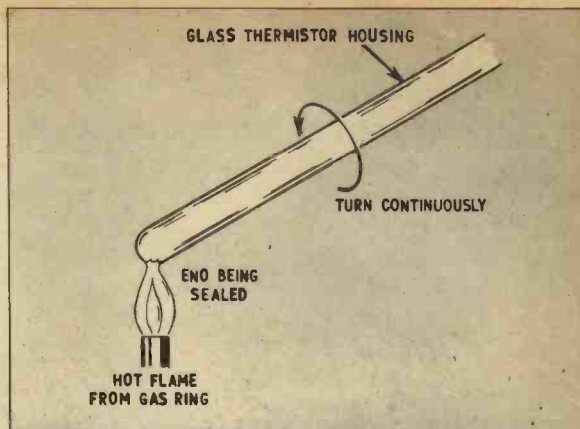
The glass tube is heated by a bunsen burner or gas ring to seal the end
